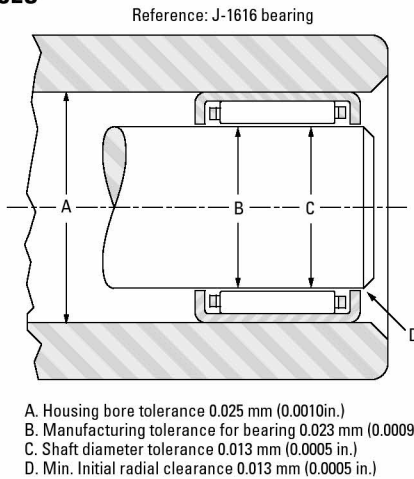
Manufacturing tolerances and resulting clearances
